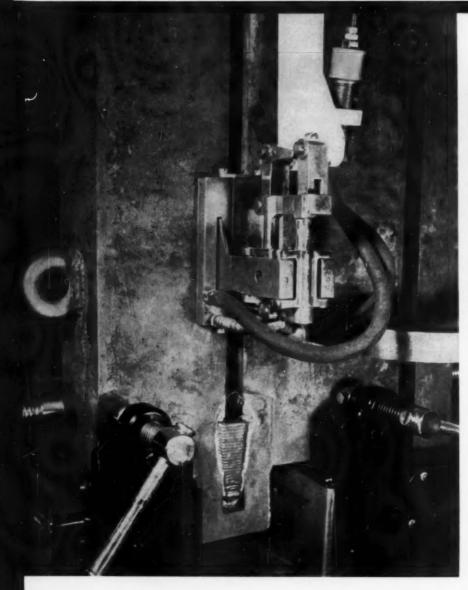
This Is the Welding Head of an Electroslag Welding Machine. The start of a weld in thick plate is shown. According to the Russians, this machine can weld parts up to 60 in. thick in one pass. Speed of welding depends on thickness of parts to be welded; it ranges from 1.3 to about 30 ft. per hr. Soviet engineers use this process widely in making heavy items such as turbine shafts, press frames, and anvils for forging hammers. Great economies are reported
